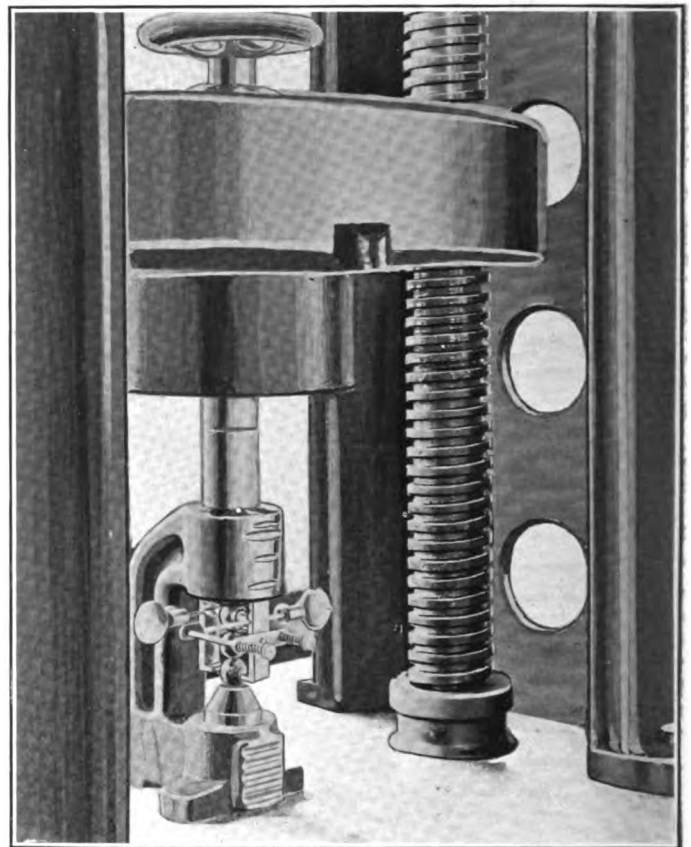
Method of Mounting Balls and Attaching Mirrors in Special Testing Fixture Placed in Riehle Machine.
